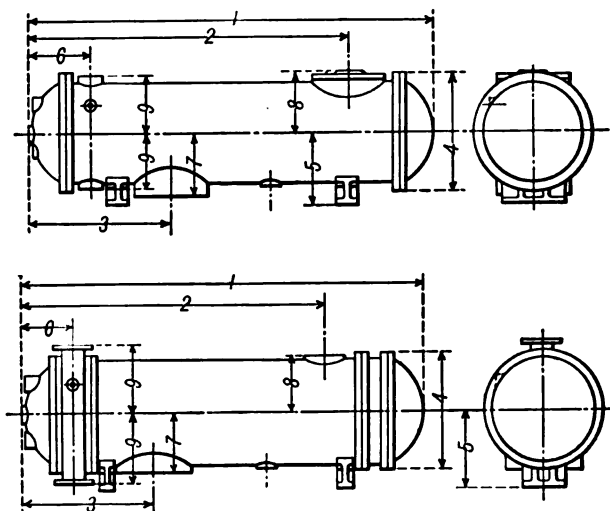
DIMENSIONS OF CLOSED HEATERS. (See Table 5.)
